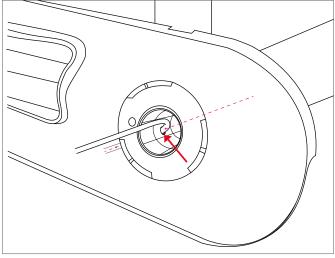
Routing the bottom bracket set cable through the sleeve
